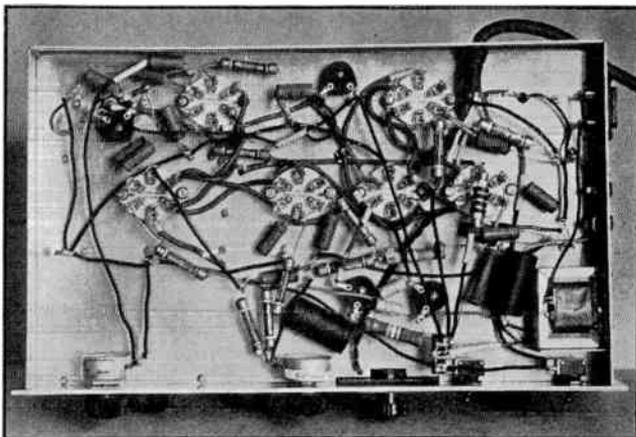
A BOTTOM VIEW OF THE SIX-TUBE SUPERHET
